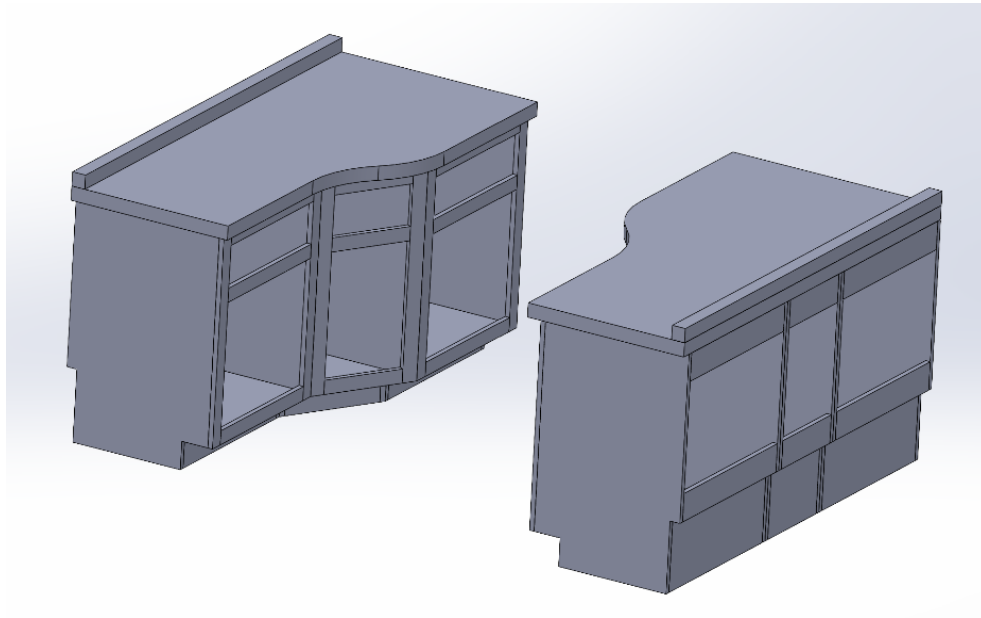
Solidworks Assembly models of Kitchen Cabinetry
